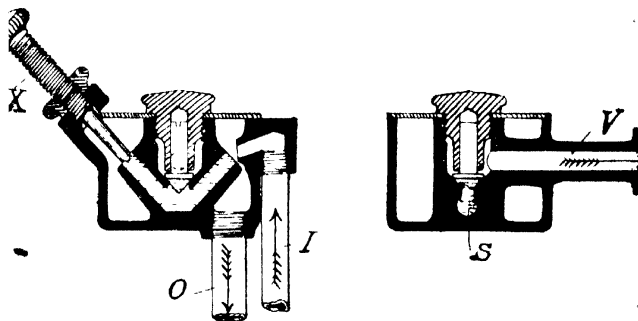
Crossley oil-measuring cup for flame-heated vaporiser.
